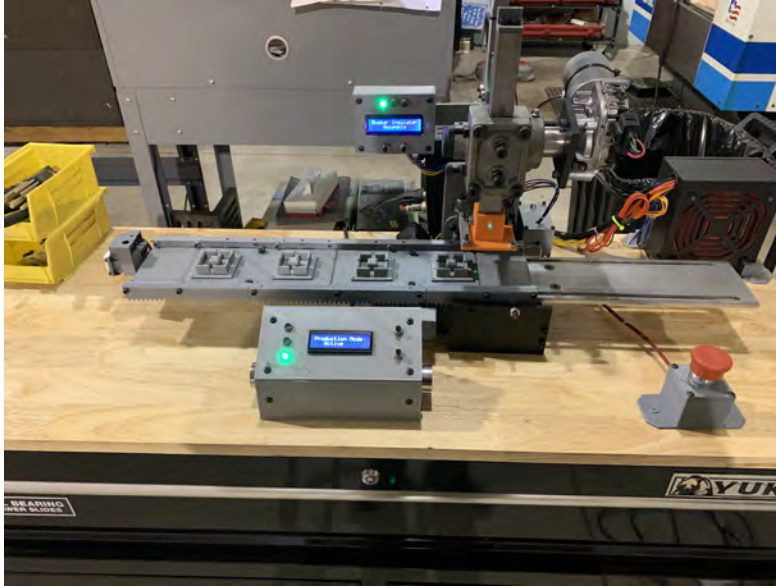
Overview of the Automated Busbar Insulator Assembly.
